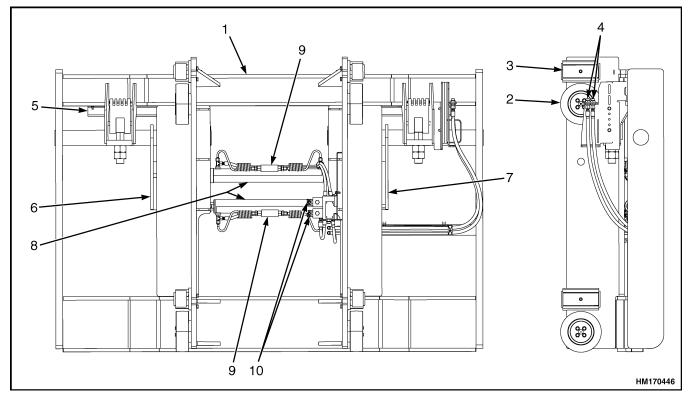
Gantry Carriage MPS (Mechanical Pile Slope)
